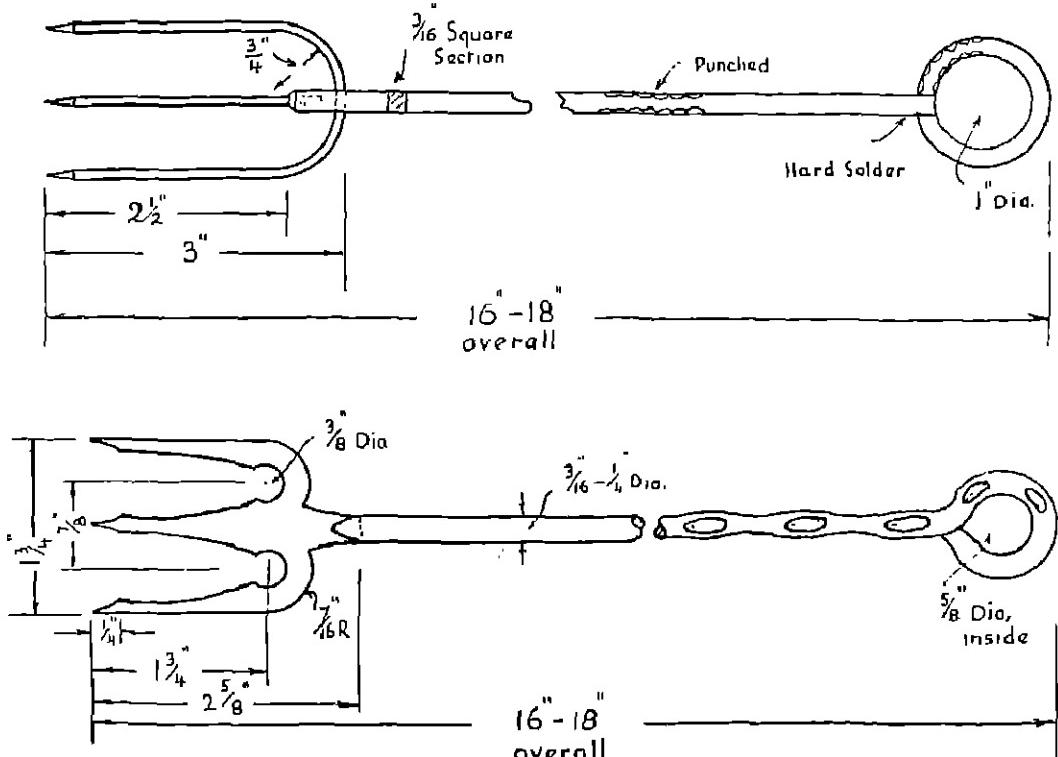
WORKING DRAWINGS OF TOASTING FORKS (TWO DESIGNS)
